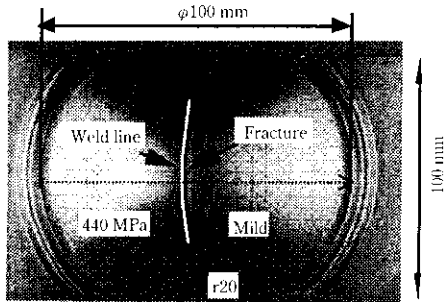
Weld line and fracture portion of test piece after plane strain stretch forming
